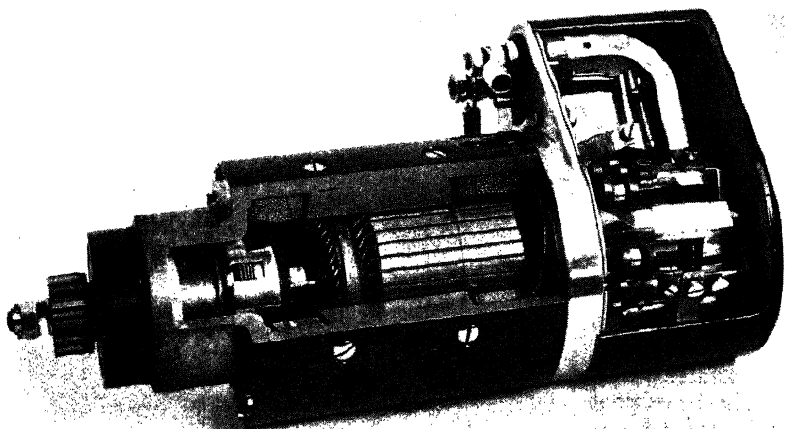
C.A.V. AXIAL-TYPE STARTER (BS6) SECTIONED TO SHOW INTERNAL CONSTRUCTION
